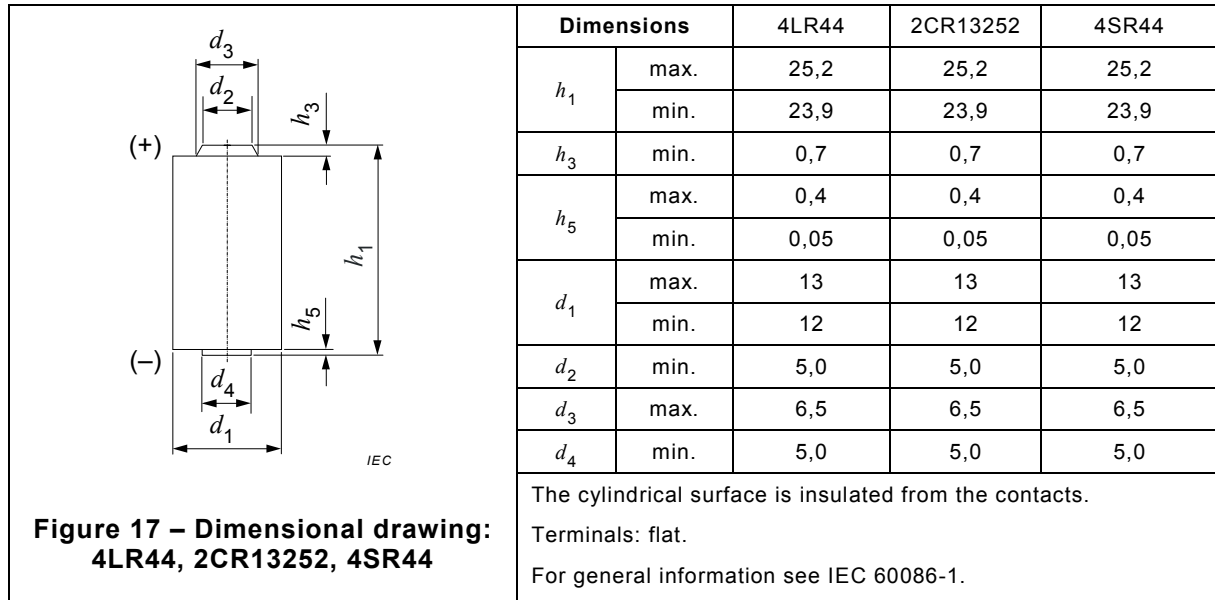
Dimensional drawing: 4LR44, 2CR13252, 4SR44
